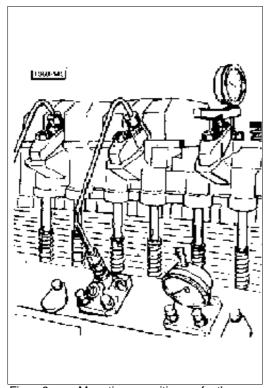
Mounting position of the no. 5.9030.617.4/10 equipment fitted with comparator.
